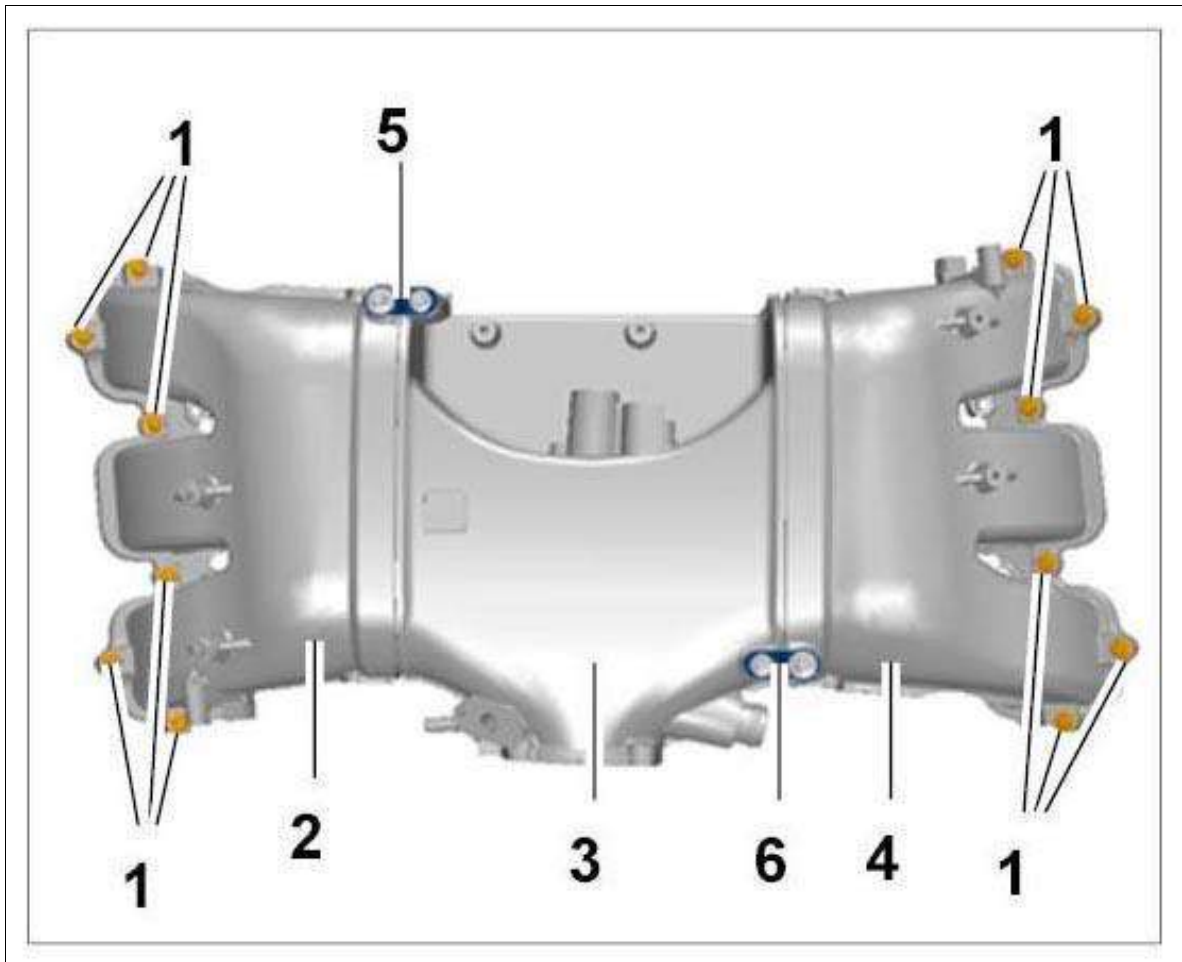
Connecting Holder Between Intake-Air Distributor And Resonance Tube 1-3
